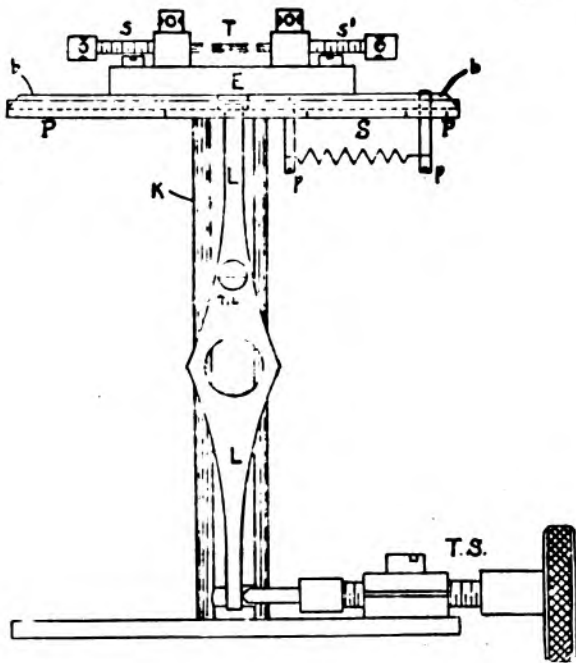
FRONT ELEVATION OF PRINTER RELAY, SHOWING ADJUSTABLE PARTS.
